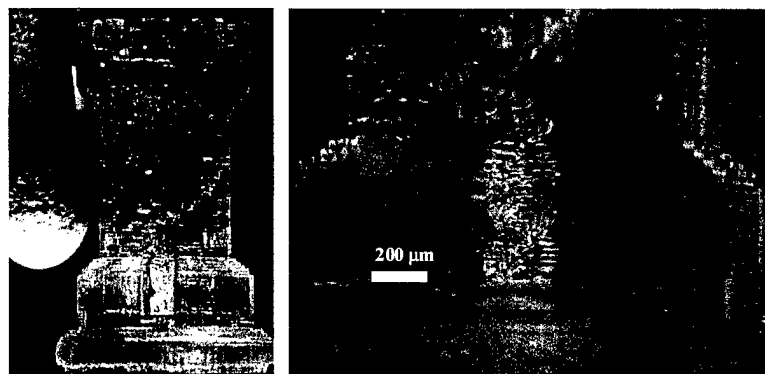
A and B: Chess tower with inner spiral staircase, enlargement.
